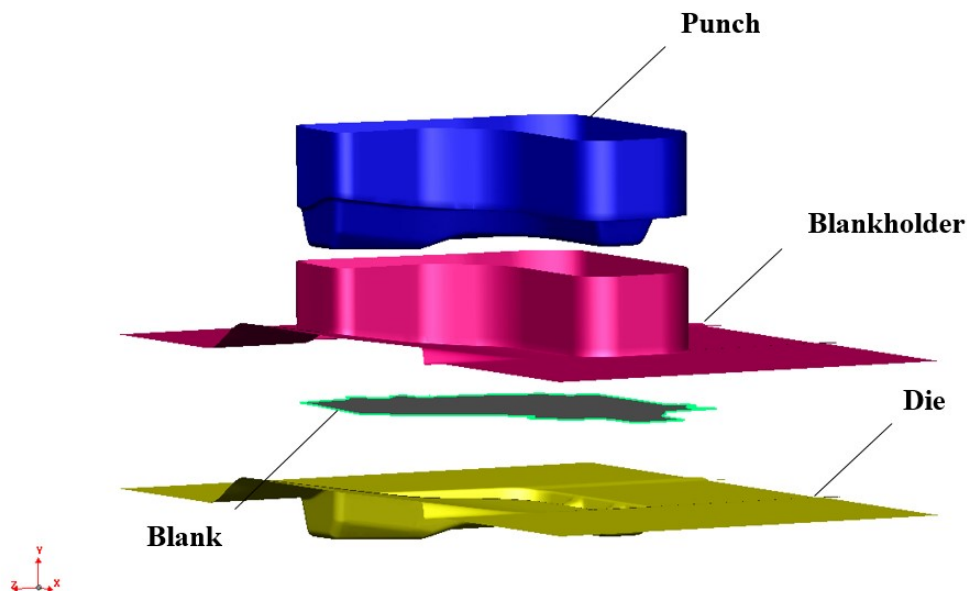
Section view of assembled forming tools for forming AA7075 L-shape component
